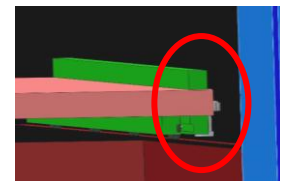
Horizontally movable plate installed in the bus connected to pinion gear
